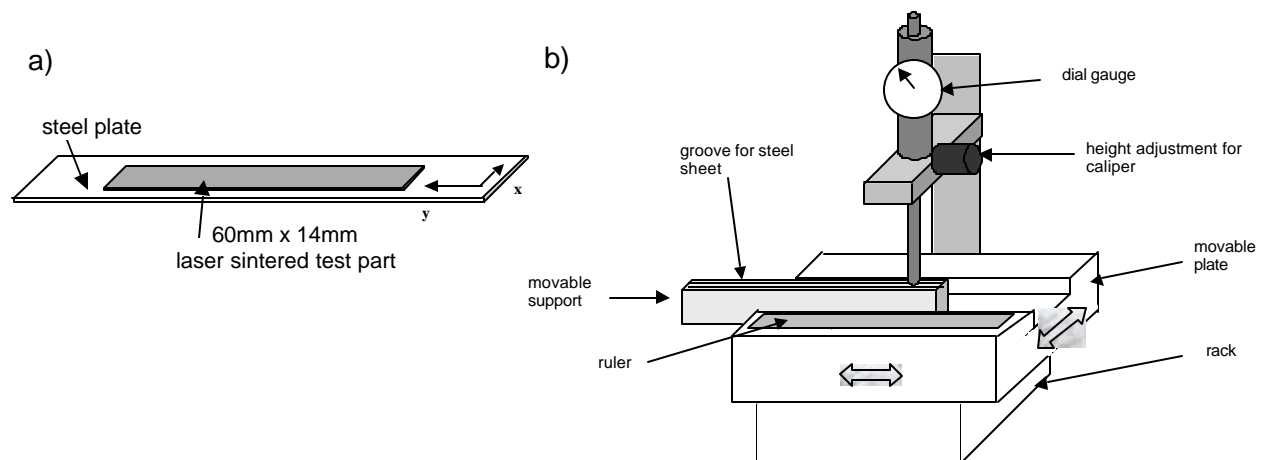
Steel sheet with laser sintered test part (a) and device for deflection measurement (b)
